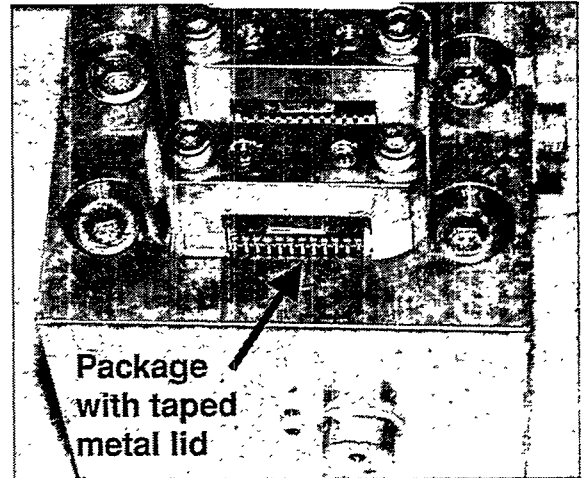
The fixture in the vibration test clamped the packages in place to prevent movement.
